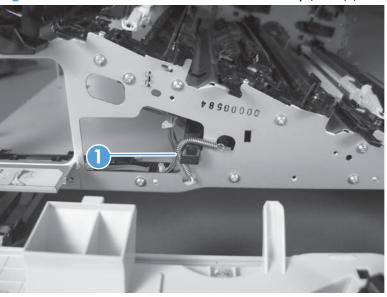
Remove the laser/scanner assembly (C/Bk) (6 of 7)
